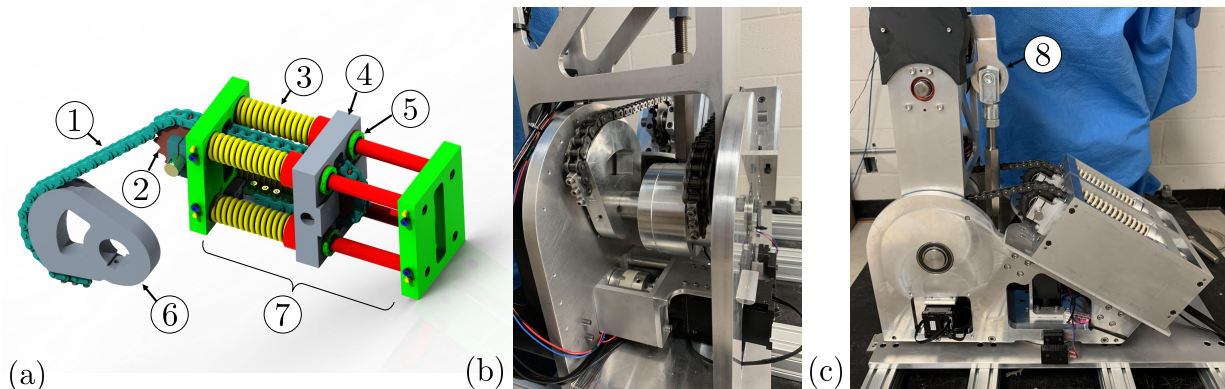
Static balancing mechanism design. (a) A CAD rendering of the design concept: ① roller chain, ② idler sprocket, ③ compression springs, ④ moving platform, ⑤ linear bearings, ⑥ cam, ⑦ 2:1 pulley reduction. (b) Close-up photo of the cams. (c) Side view of the static-balancing design: ⑧ parallelogram mechanism.
